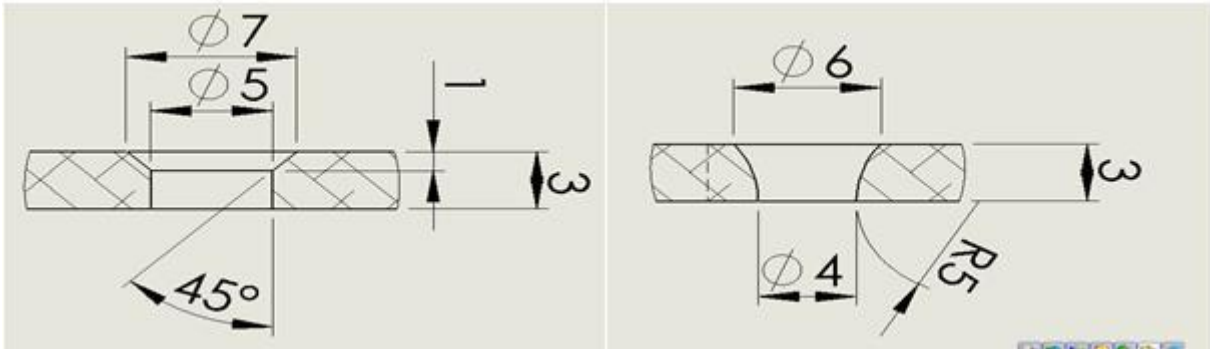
Specimens with the details of rivets housing reaming with dimensions in mm
